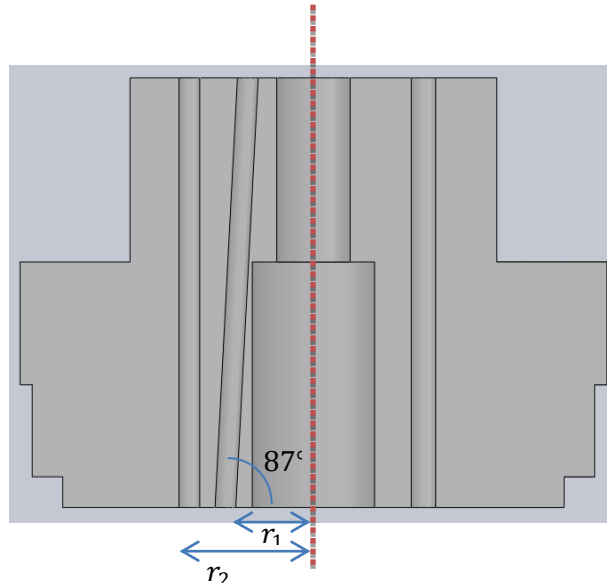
Cross section view of the bottom crucible lid showing holes for the thermocouples
